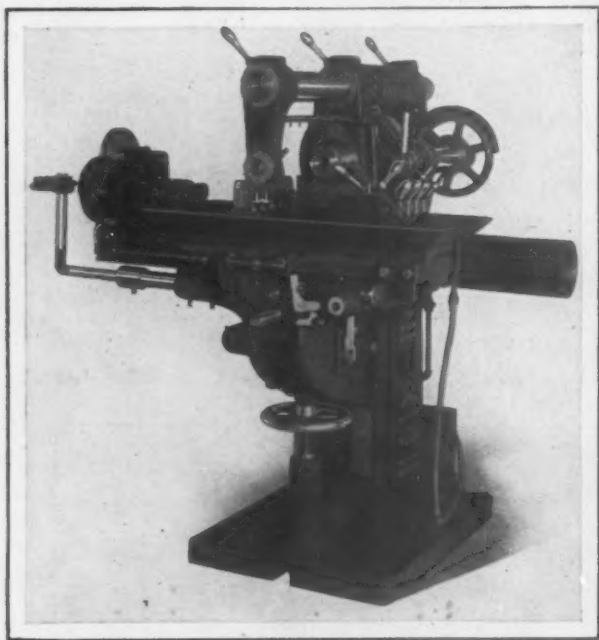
The No. 13½ Automatic Index Milling Machine Built by the Garvin Machine Company, New York City
